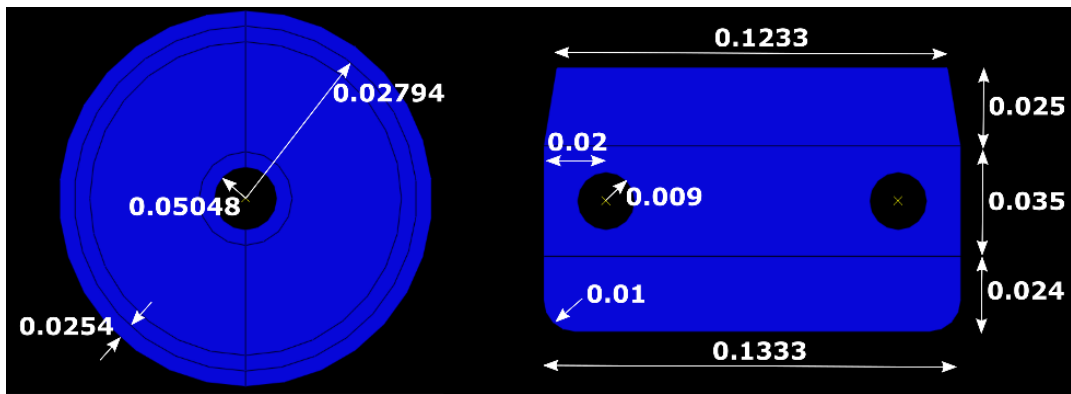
Dimensions for Road Wheel and Track Pad Assembly (m)
